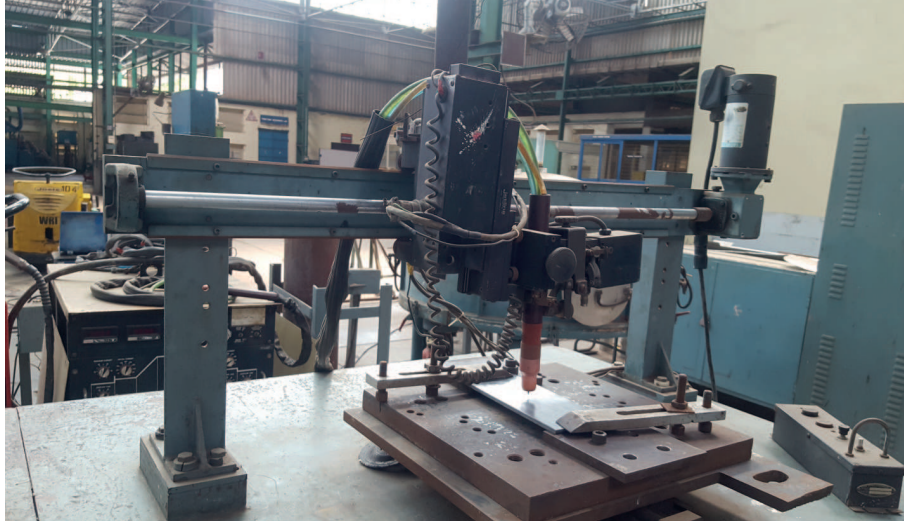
Image of Kemppe master TIG MLS 4000 welding machine with automatic torch travel setup
